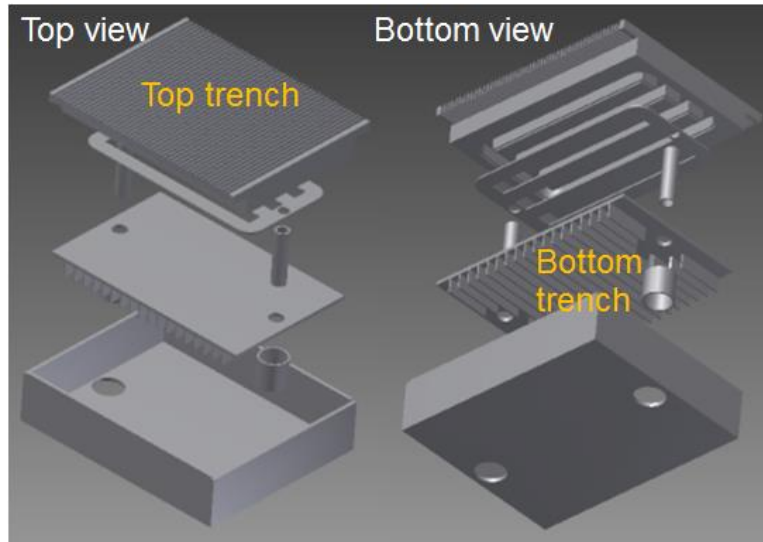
The explosive view of the CAD drawing for the LiMIT design tested in HT-7 tokamak
